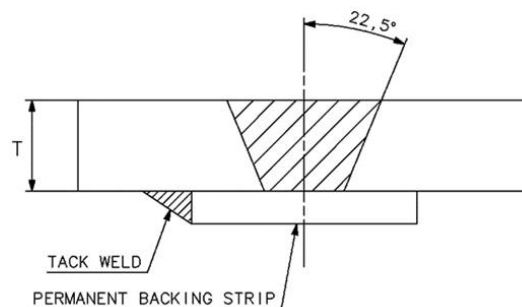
Type of weld joint – Butt weld joint configuration used for fabrication of mass manufacturing components
